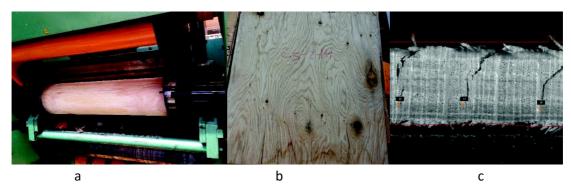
a) Rotary peeling machine, b) Veneer made from secondary quality Oak, C) Measurement of lathe checks depth and frequency using SMOF device
